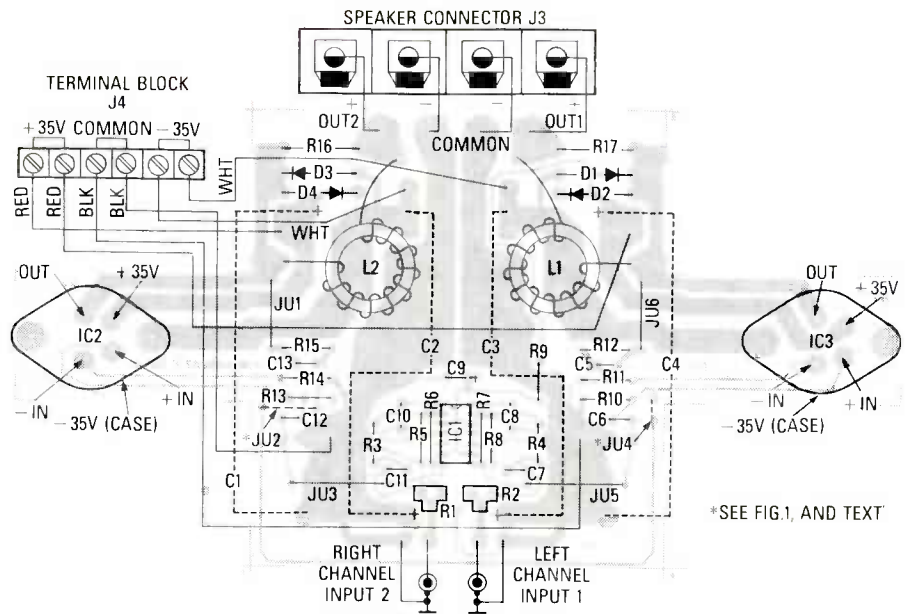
PARTS PLACEMENT FOR THE OPTO-AMP. The inductors should be wound exactly as shown.
